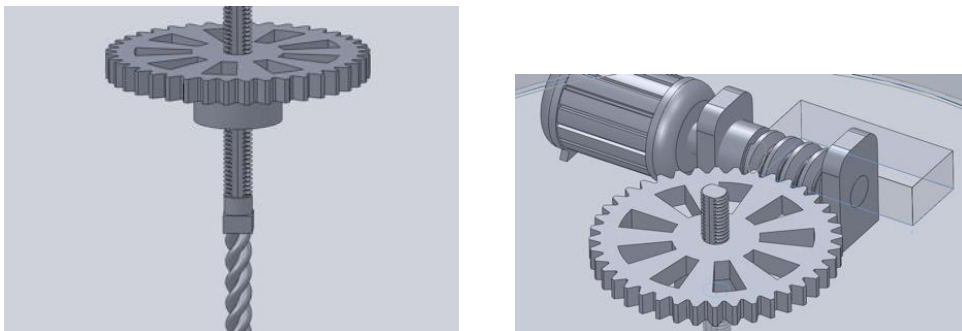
On the left the cable that connects the buoy to the generator is attached to a screw running through a gear [19], on the right overview of the worm gear and the motor.
